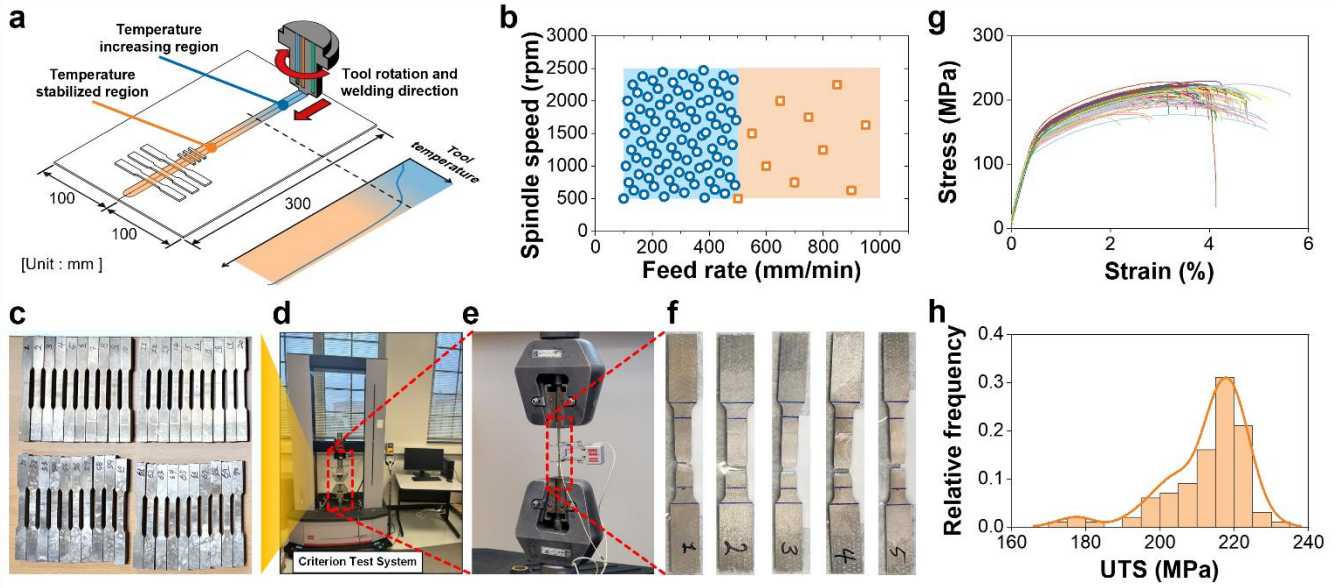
Mechanical test specimen preparation. a Position of tensile specimens and geometry of the FSWed aluminum workpiece. b Sampling of FSW conditions using Hammersley Sequence Sampling (HSS). c Extracted tensile specimens. d, e The used tensile testing machine and tensile test setup. f Examples of the fractured tensile specimens. g Strain-stress curves of all the tested specimens. h Distribution of the ultimate tensile strength (UTS) of the tested specimens.
